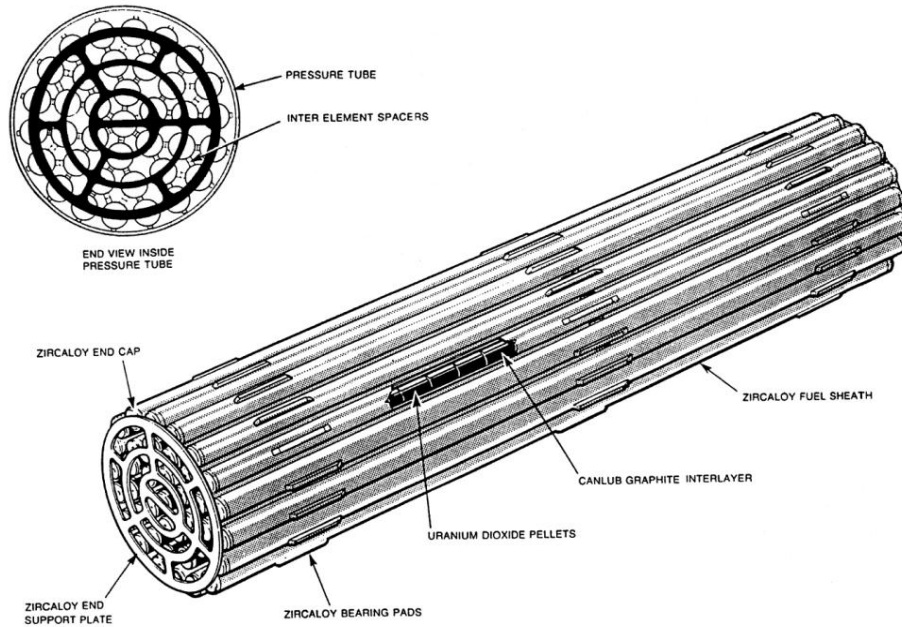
Schematic view of a CANDU 37-element fuel bundle. Reproduced from [4].
